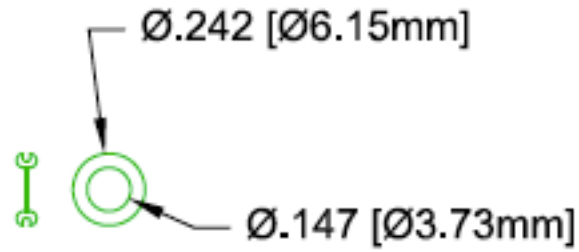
Side and top view of Inconel C-rings. Outer diameter is equal to 0.242 inches (6.15mm). Inner diameter is equal to 0.147 inches (3.73 mm).
